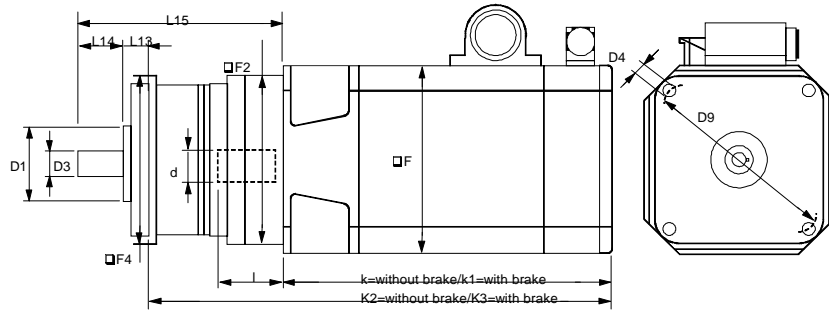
1FT6 motor with planetary gear (alpha company)
